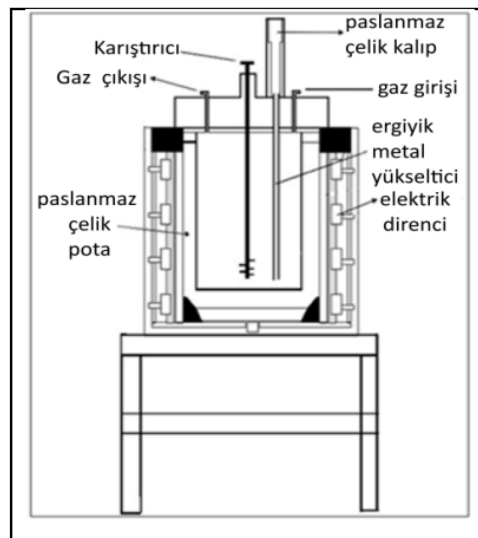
Diagram of low pressure permanent mold casting furnace.
